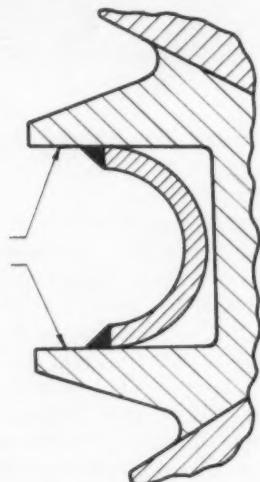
(Top) Cross section of a reactor seal-ring area, showing the 1/4-inch ring and the welds (solid black triangles) which are milled away to remove the ring from the flanges above and below it.
